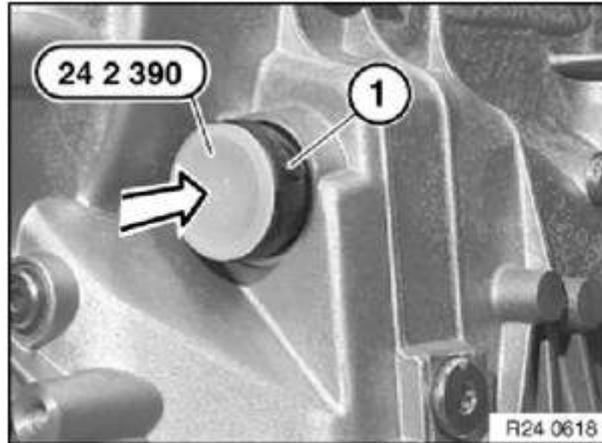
Inserting Special Tool (24 2 390) In Sealing Cup
